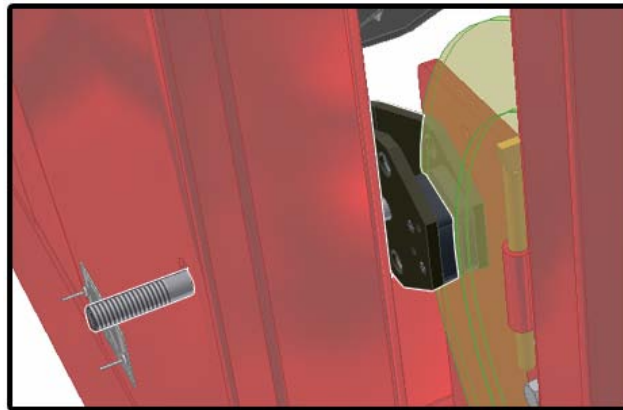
Install Brake Calipers (Parts removed for clarity)
